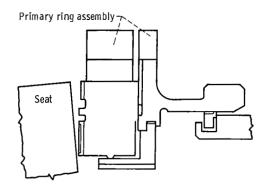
Coning displacement of seat, causing nonparallel faces in primary seal and in self-acting geometry.
